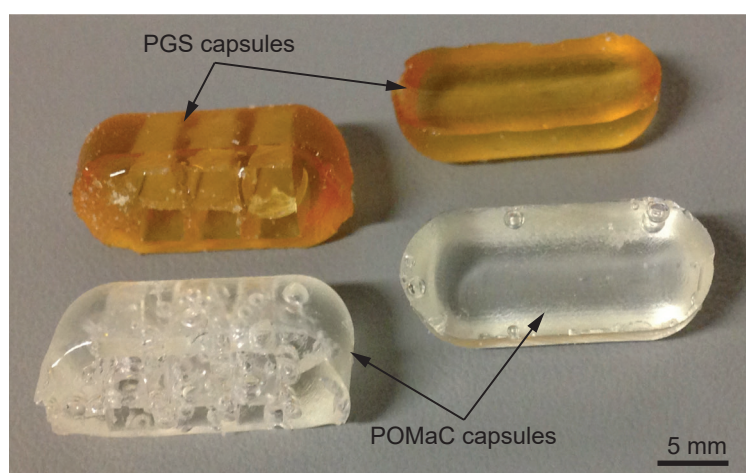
PGS and POMaC capsules. PGS and POMaC capsules fabricated by micro-molding. Some capsules were fabricated with the reservoirs for the drug, and some were simply molded in the bottom mold, without closing the mold, and thus without the reservoirs.
